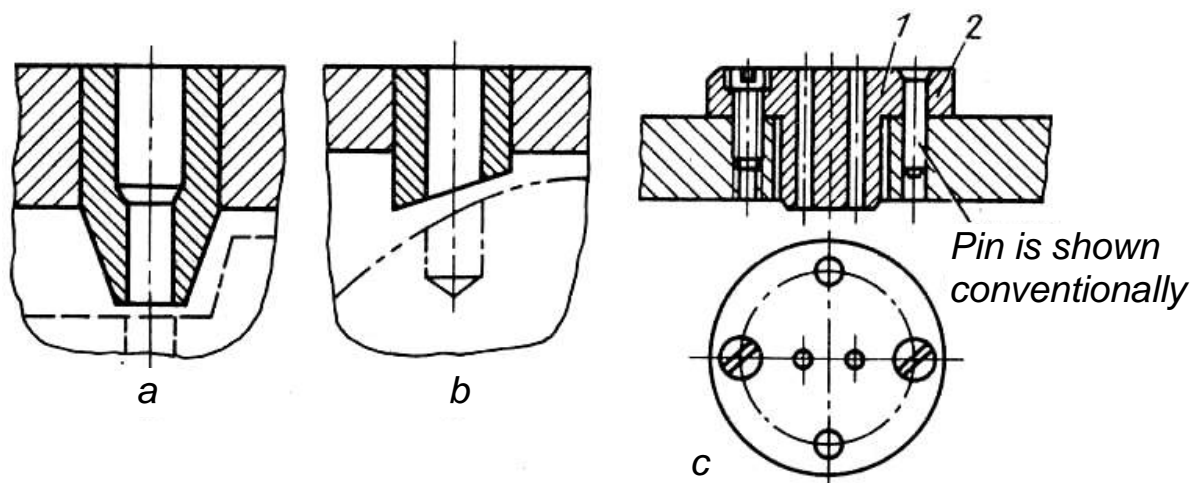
Special jig bushings for drilling: *a* – on a step; *b* – on a curved surface; *c* – of two holes located at small distance
